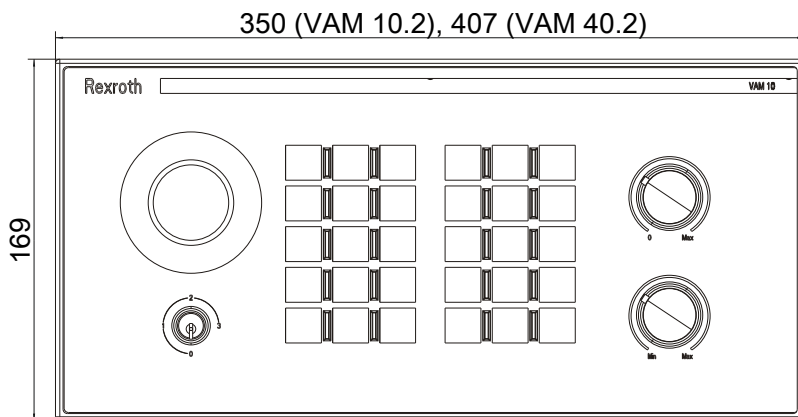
Front view of the IndraControl VAM 10.2/VAM 40.2
